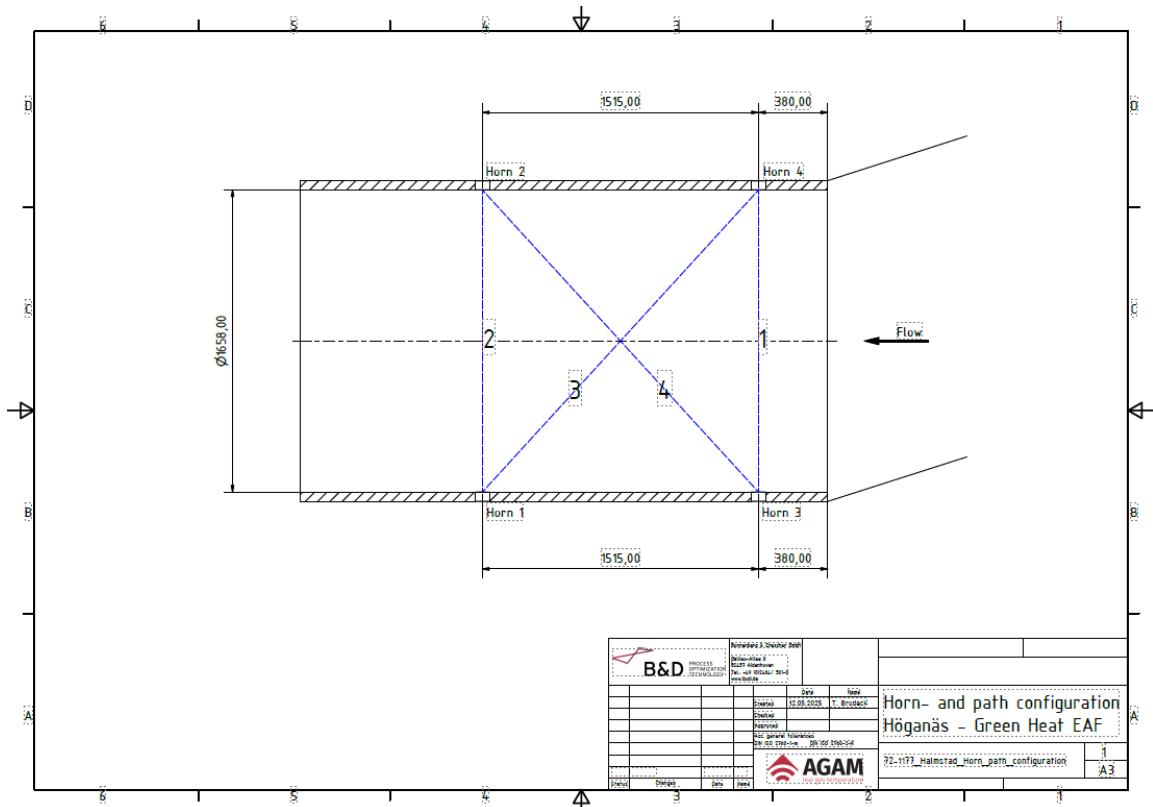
Arrangement of AGAM horn, horizontal cross section
